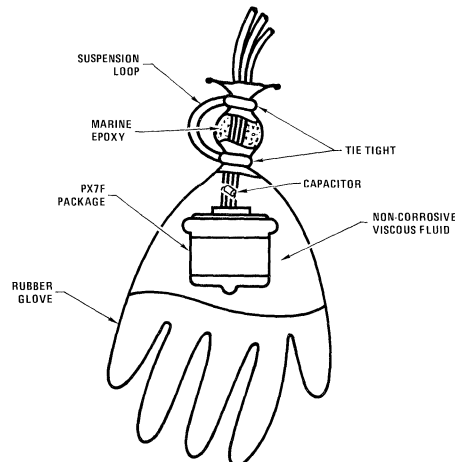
LX17XXF Transducer in Rubber Glove Assembly
